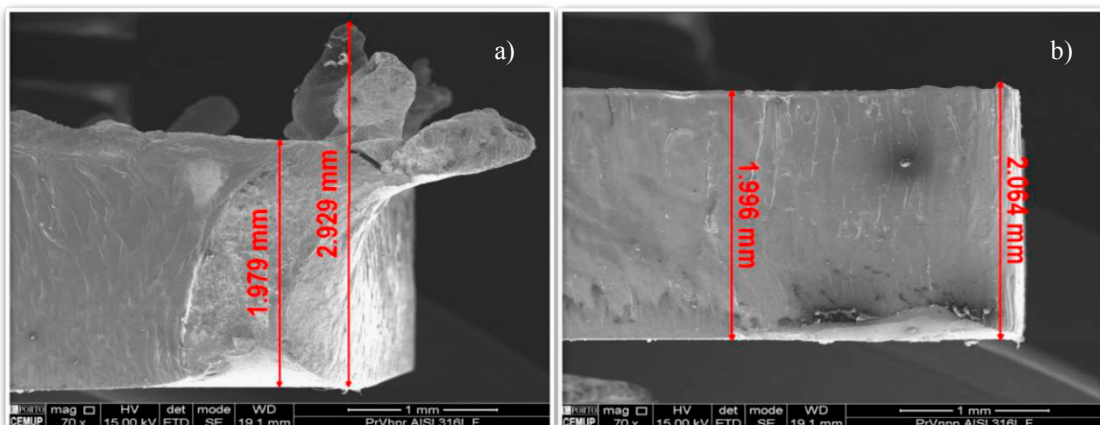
(a) sample of AISI 316L with burr; (b) sample of AISI 316L without burr
